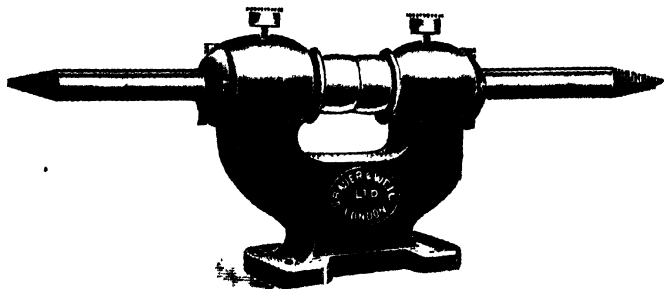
POLISHING SPINDLE WITH BALL BEARINGS
